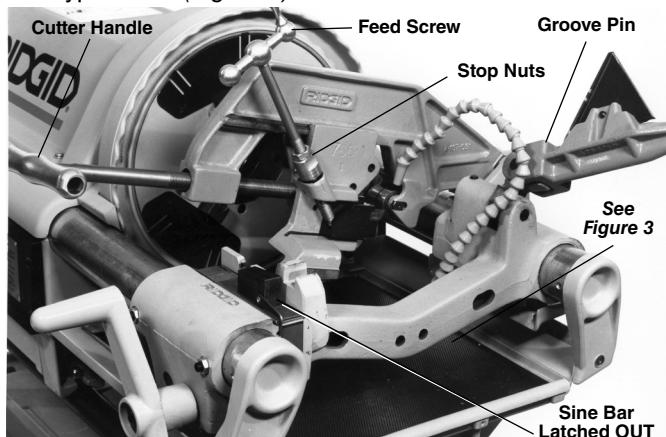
No. 766 Blade Type Cutter Installed (Shown with Die Head Removed for Illustration Only)
